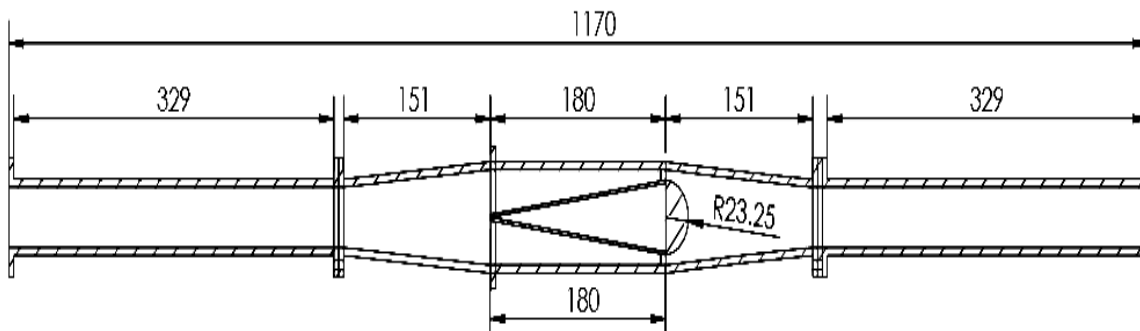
Schematic layout of exhaust heat exchanger (test section 60 × 60 × 180 mm) with cone-insert (G-type).
